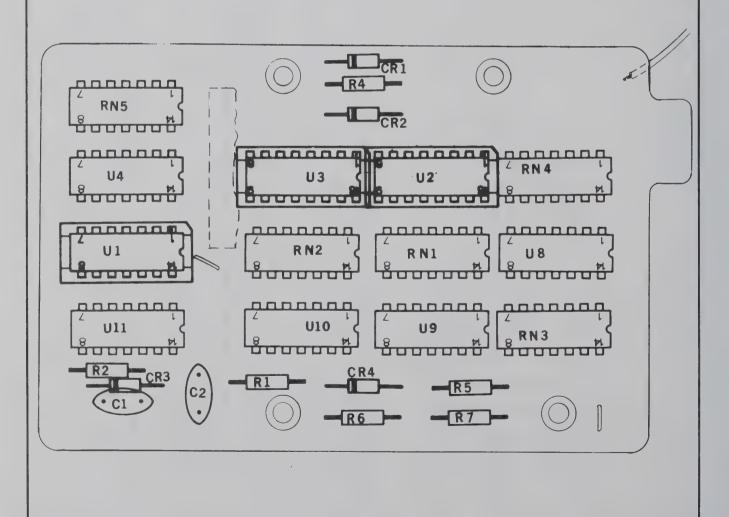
DPOU PCB ASSEMBLY, OPTION -02
